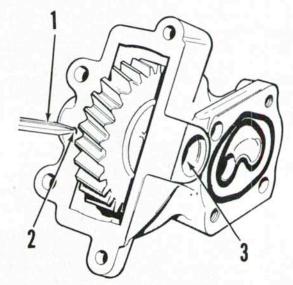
If necessary, idler shaft plug (3) can be removed from housing by applying compressed air at bleed hole (1).
